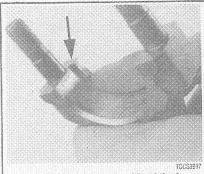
The notch on the side of the bearing cap matches the tang on the bearing insert
